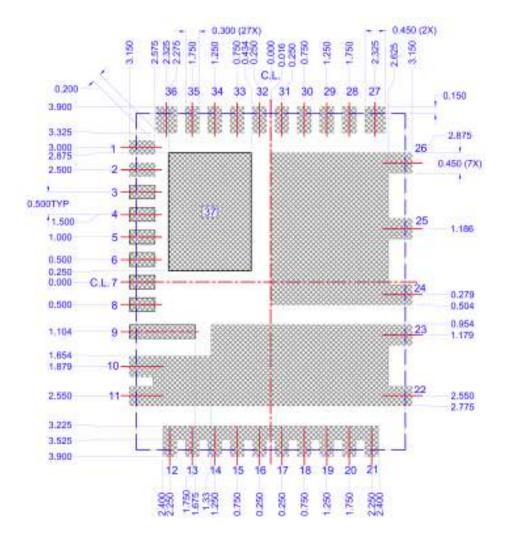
Clip Bond PQFN 6.0mm x 7.5mm Package Dimensions
